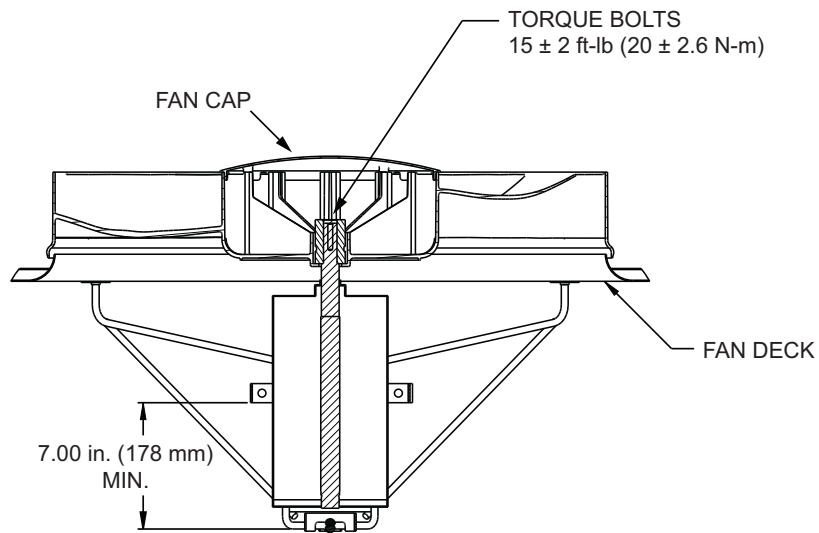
Aeroacoustic Fan (Gray Bolt) Mounted Position
